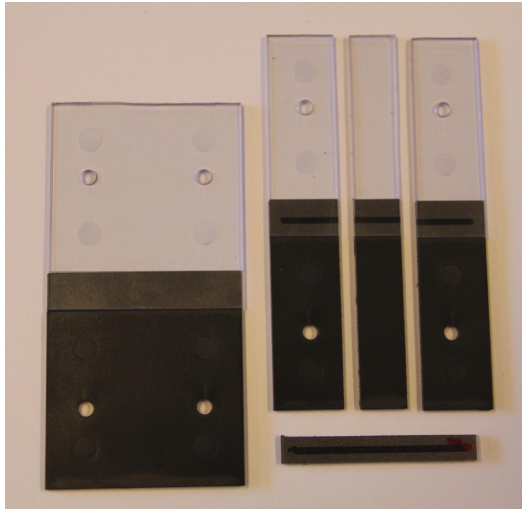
A laser welded specimen presented together with the two test specimens; a strip for lap-joint shear testing and a beam for the ADCB method.
